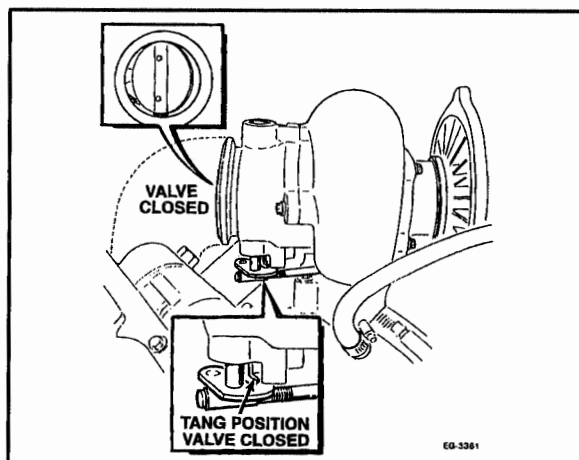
Exhaust Back Pressure Valve Closed
